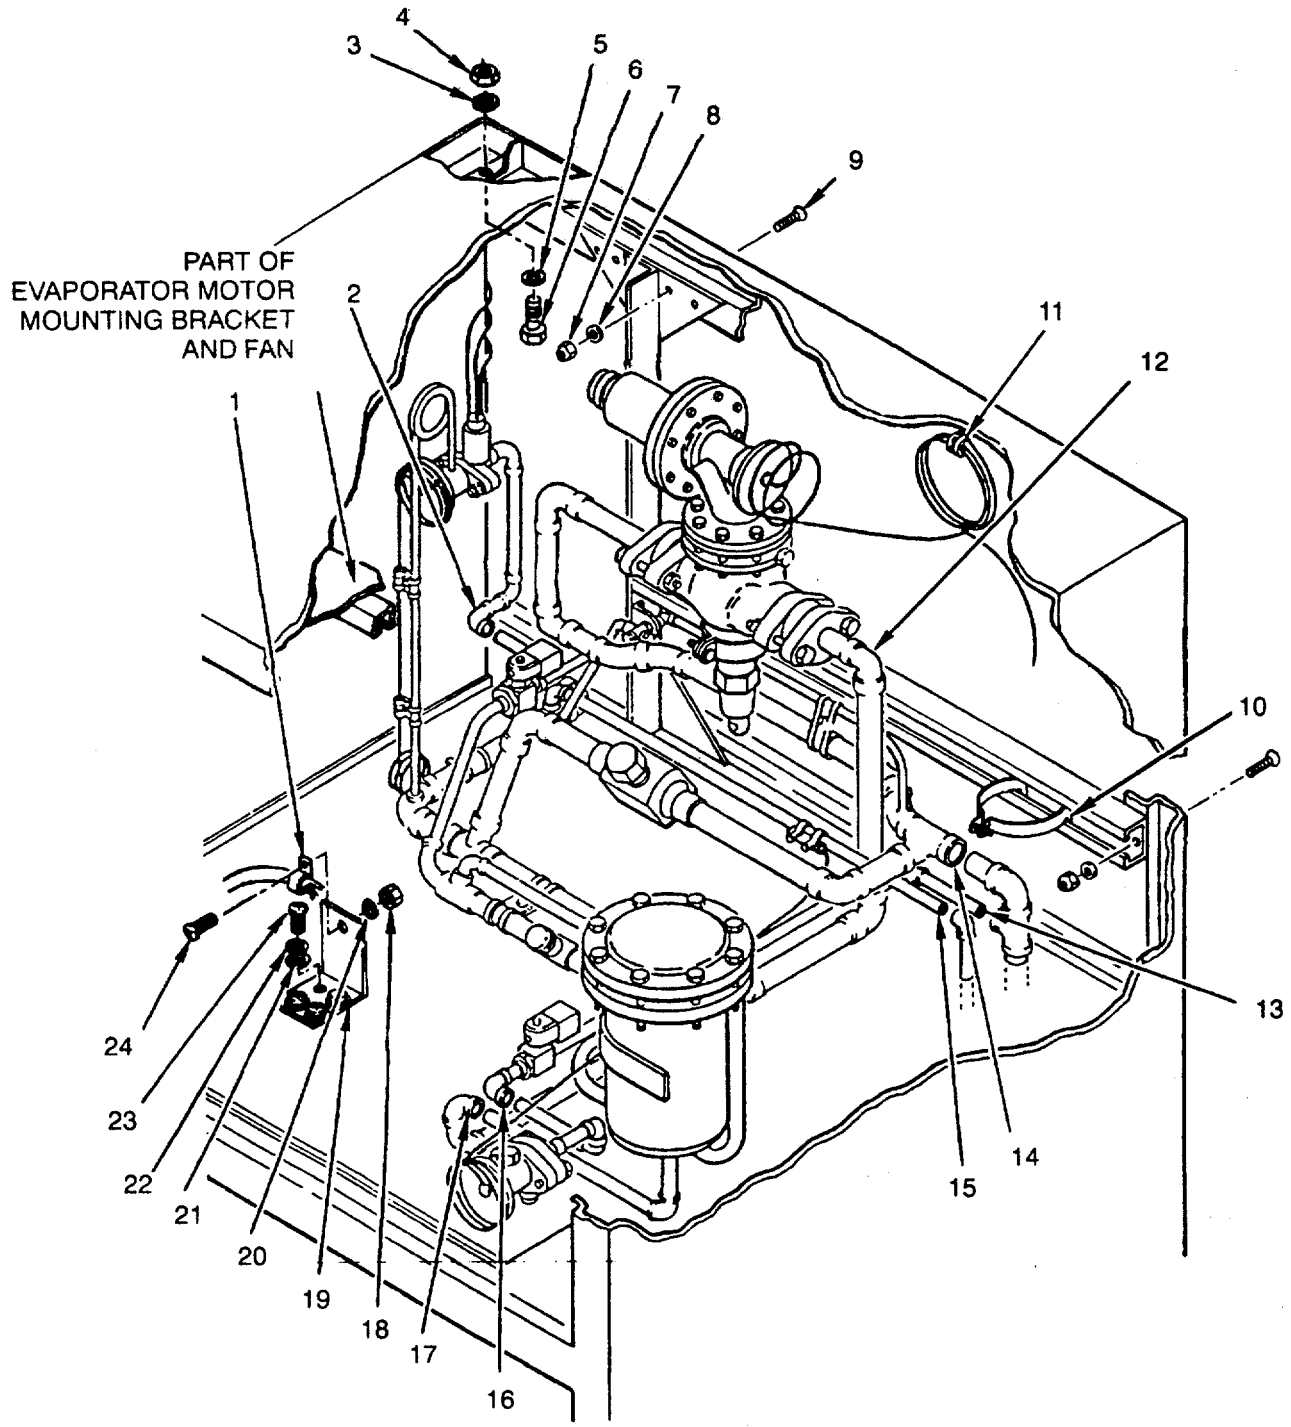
Evaporator Coil Removal (Sheet 1 of 2)
